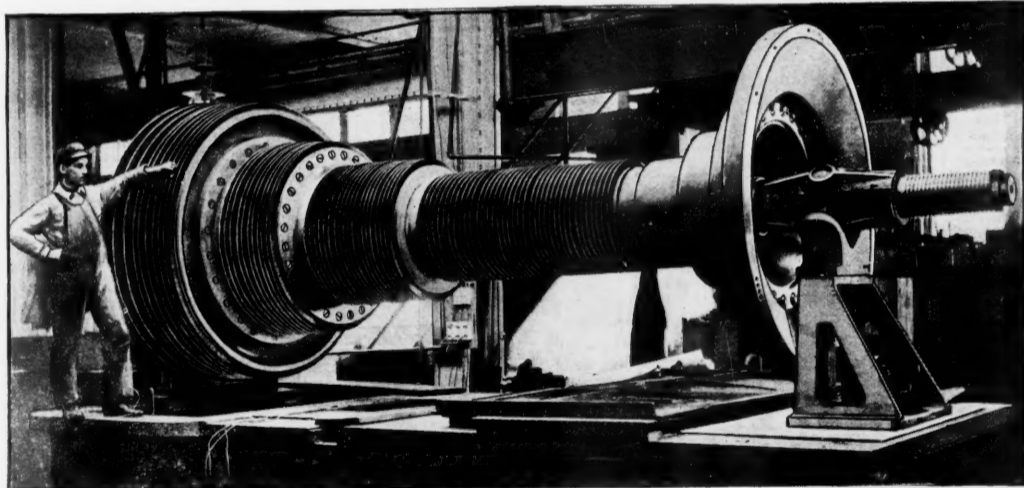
Complete Revolving Part of 3,000 H. P. Turbine.
